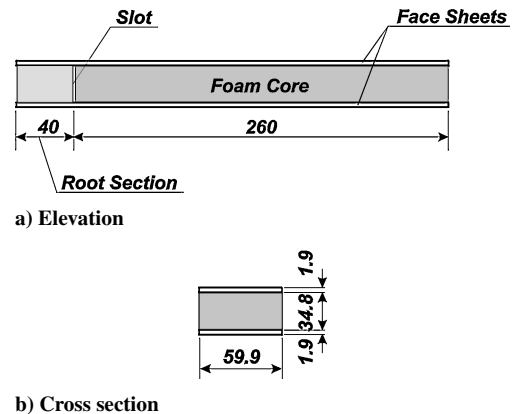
Schematic of the cantilever sandwich beam specimen (dimensions in millimeters).
